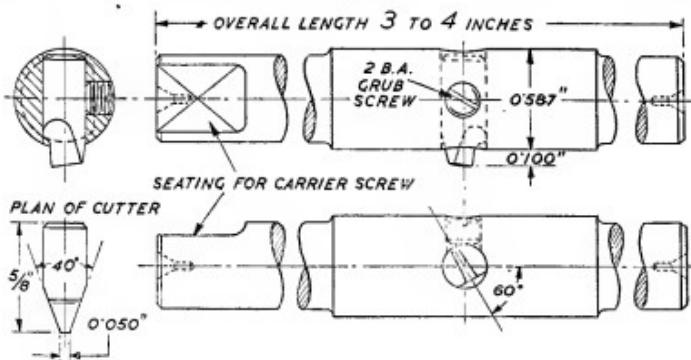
Cutter bar and fly-cutter for generating worm wheel teeth.
